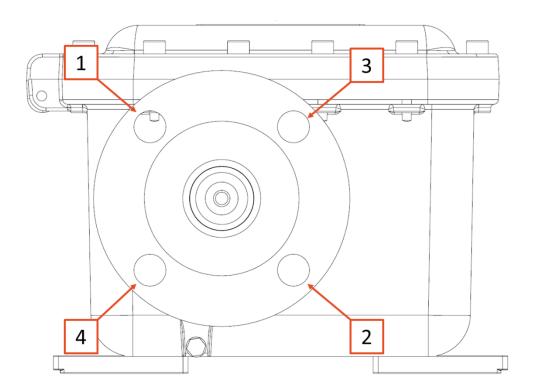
Front view of lap-joint flange, hub and bolt holes. Tighten bolts in steps in order 1-2-3-4 to ensure even compression of the gasket
